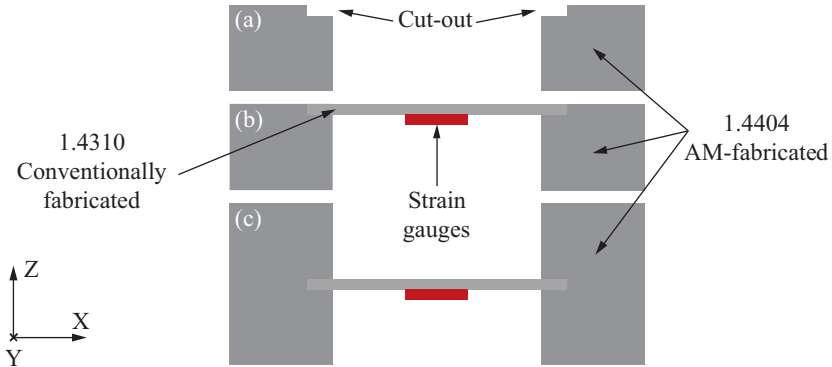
Build-up process with LPBF-manufactured deformation body; production of base body (a); insertion of the steel plate as the measuring element carrier (b); completion of the prototype and application of the strain gauge (c)
